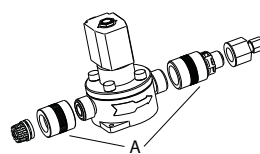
Solenoid valve OCD-162-05, -10: exploded view
